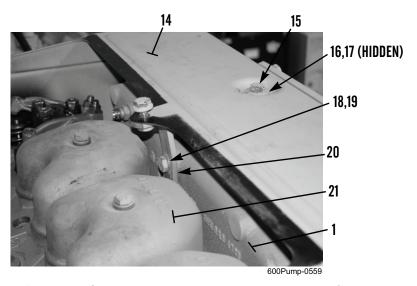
Upper Cooling Air Duct Panel and Intake Manifold.
